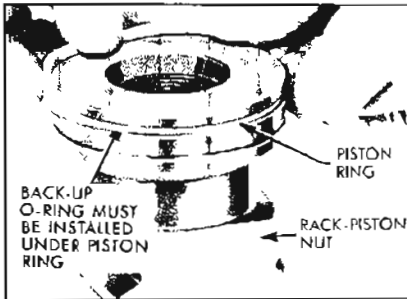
Installing Rack-Piston Ring on Rack-Piston Nut
